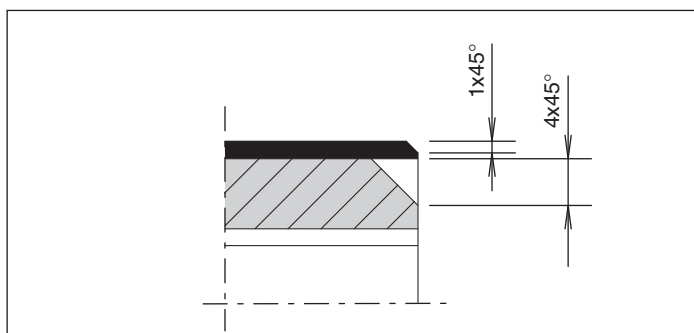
Welding edge preparation for Janisol 2 / C4
